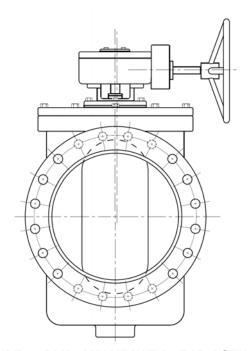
PLUG VALVE WITH GEAR ACTUATOR
